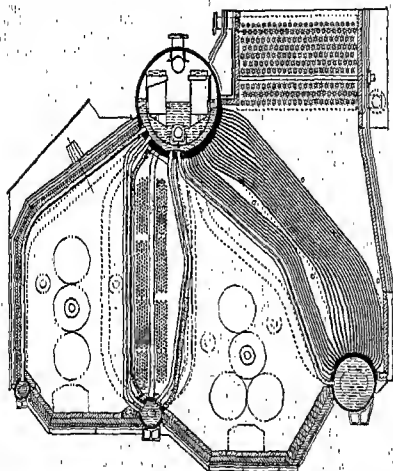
Babcock and Wilcox bent-tube boiler with separately fired superheater.
